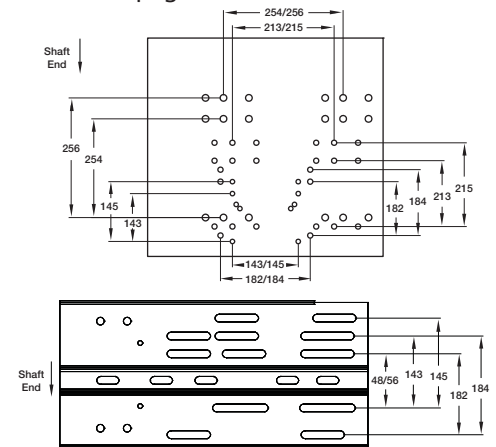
Motor Mounting Positions Based on Motor Frame Size
